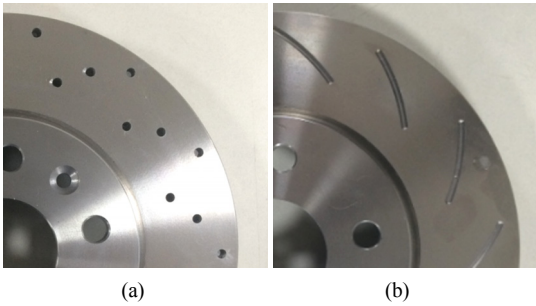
Machined patterns of disc brake rotor : (a) cross-drilled hole pattern, (b) slotted pattern
